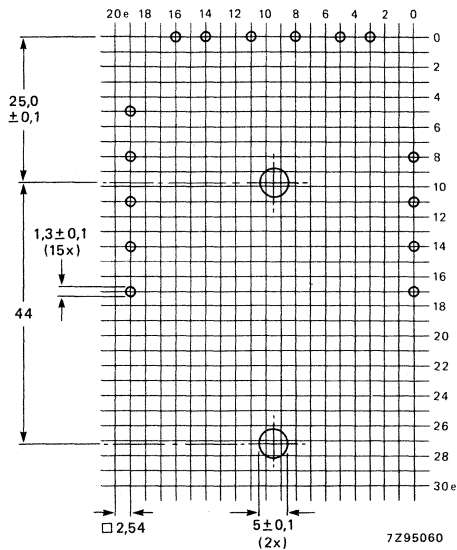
Hole pattern for mounting on a printed-wiring board (solder side).
